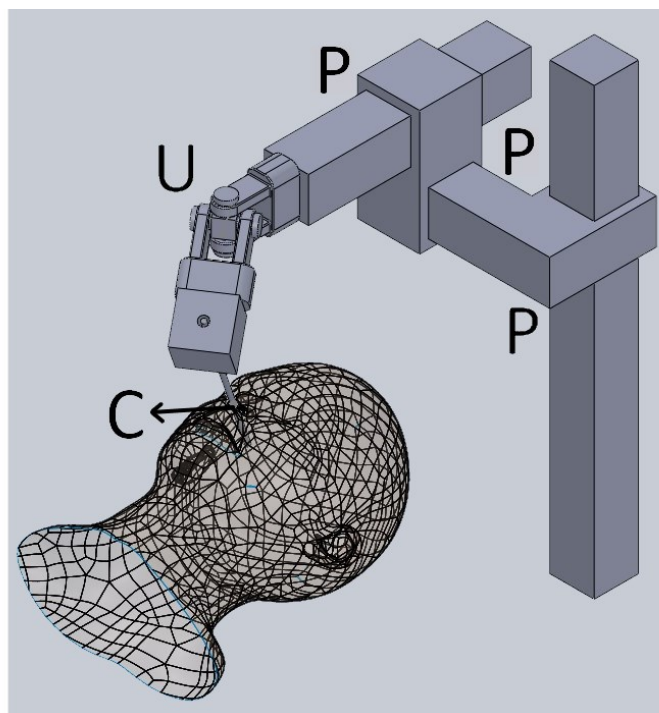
An example of using passive joint, $\lambda = 6$ Design
